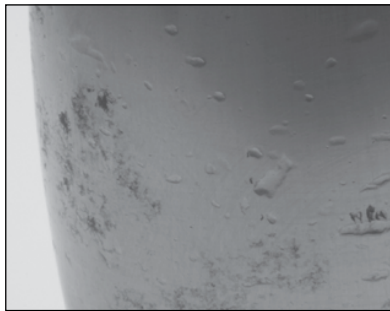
Hard particles caused contamination bruising on this spherical roller bearing
